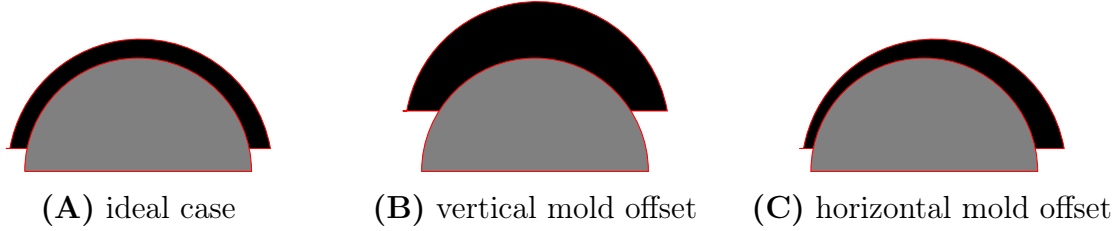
A cartoon drawing of molding defects. A: ideal case, the coating and the lenslet are perfectly aligned. B: misalignment of the hemisphere and mold cavity in the vertical direction and C in the horizontal direction. These misalignments cause error in the layer thickness which can lead to a pointing off-set error.
